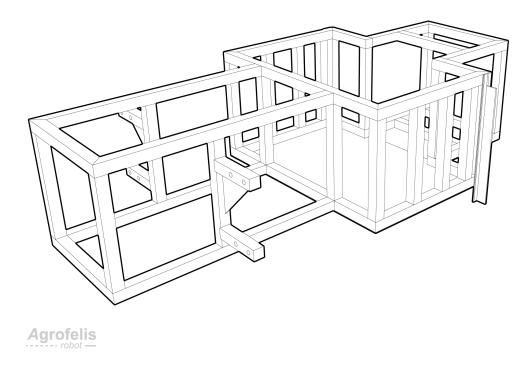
Manufacturing the frame step 5, back wheels attachment fabricated
